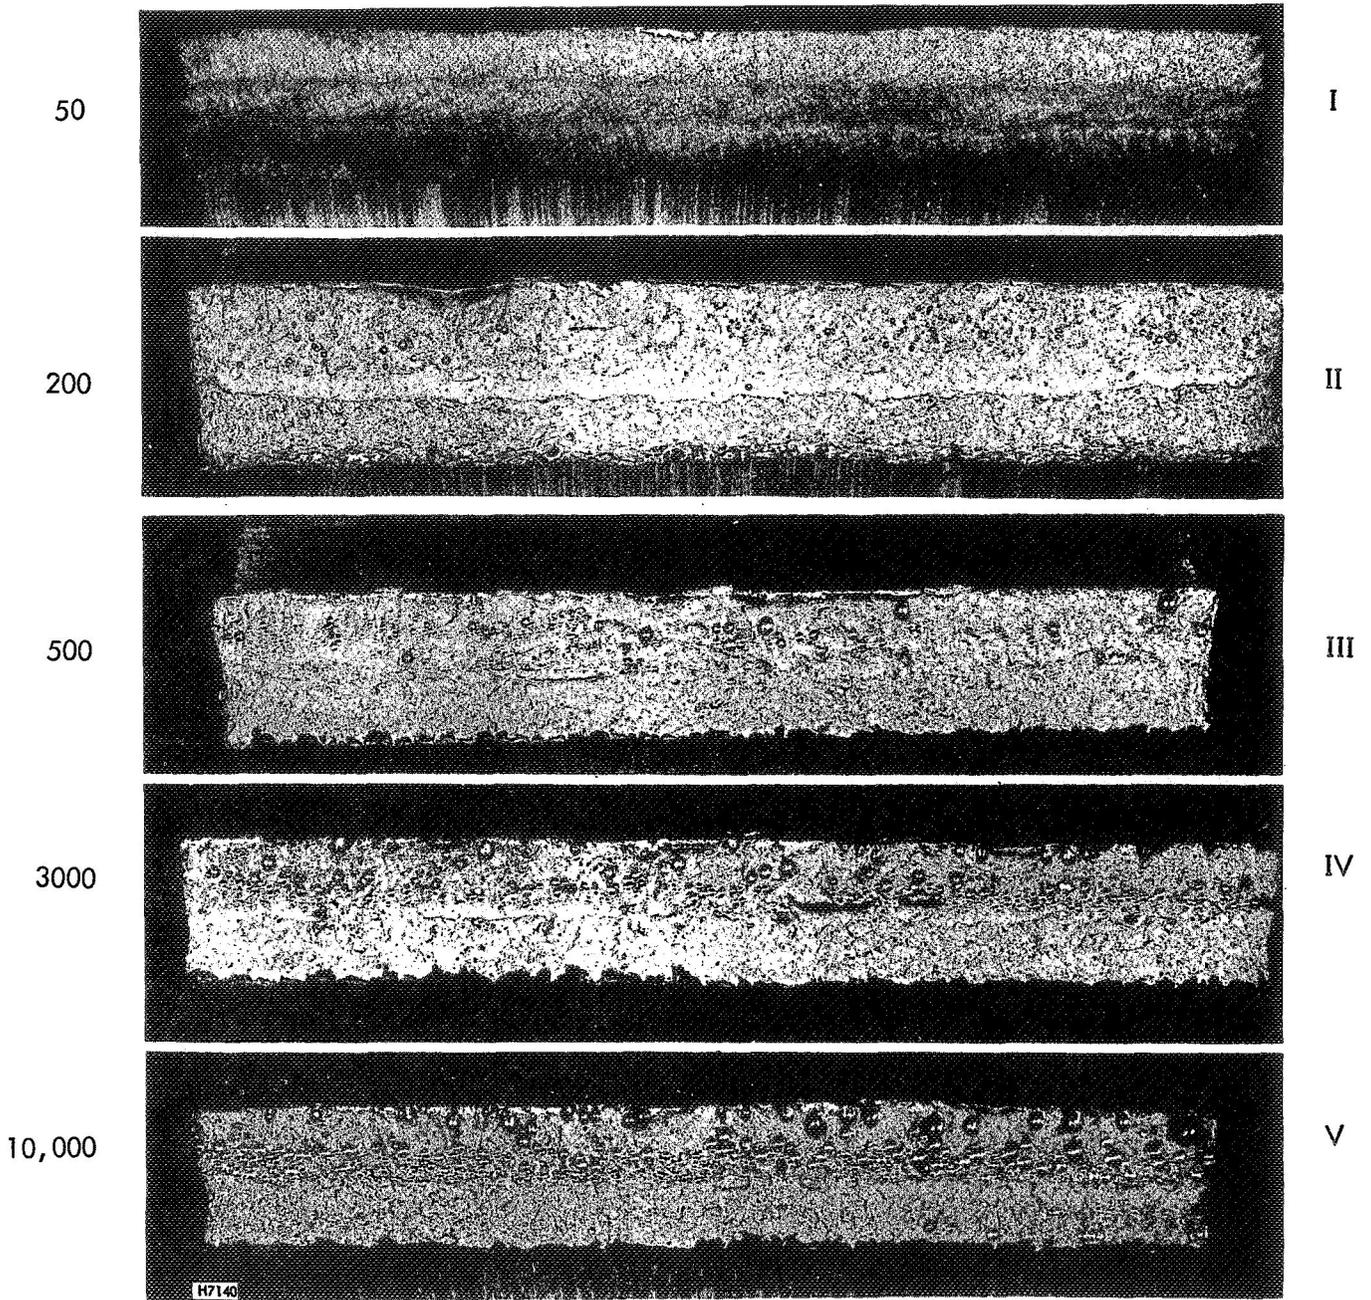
Fillet Weld Fracture Porosity Standards
